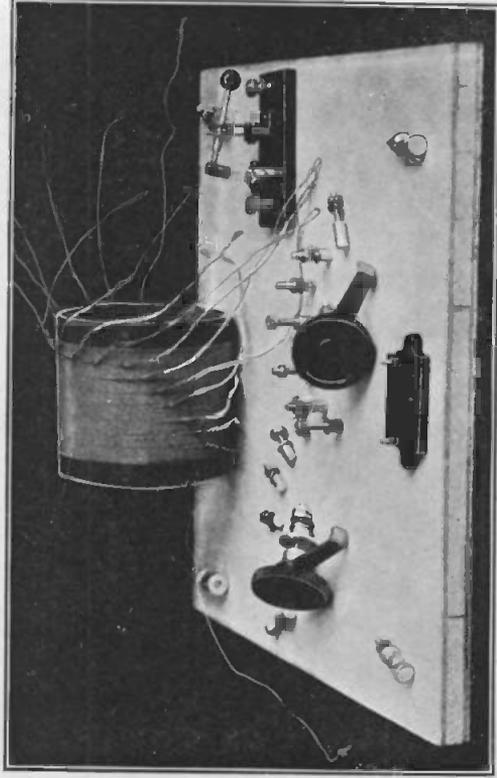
PARTS OF RECEIVING SET ROUGHLY ASSEMBLED READY FOR FIXING
